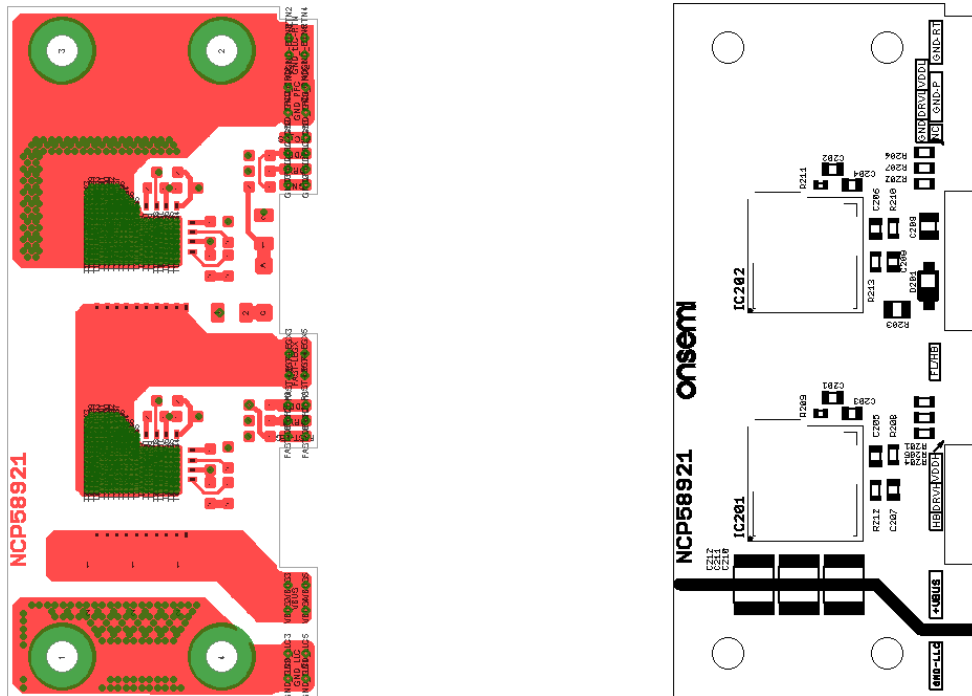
Top Layer PCB Layout and Assembly Plan of LLC HALF BRIDGE CARD
